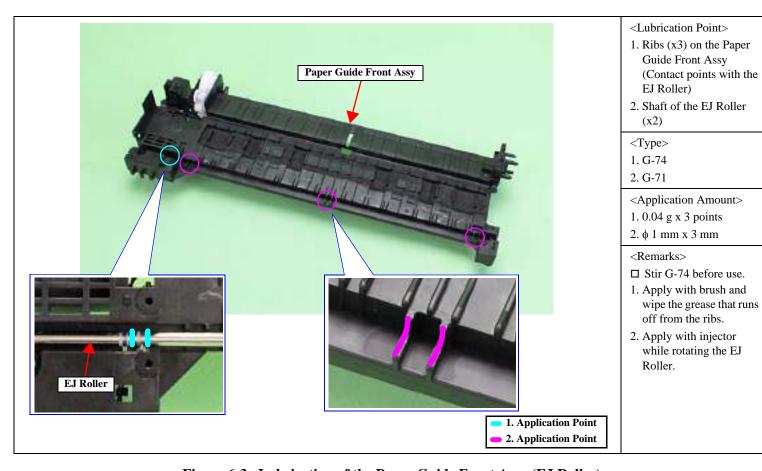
Lubrication of the Paper Guide Front Assy (EJ Roller)
